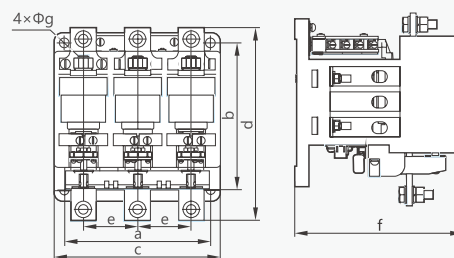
CKJ5-400 Appearance and Installation Dimensions
